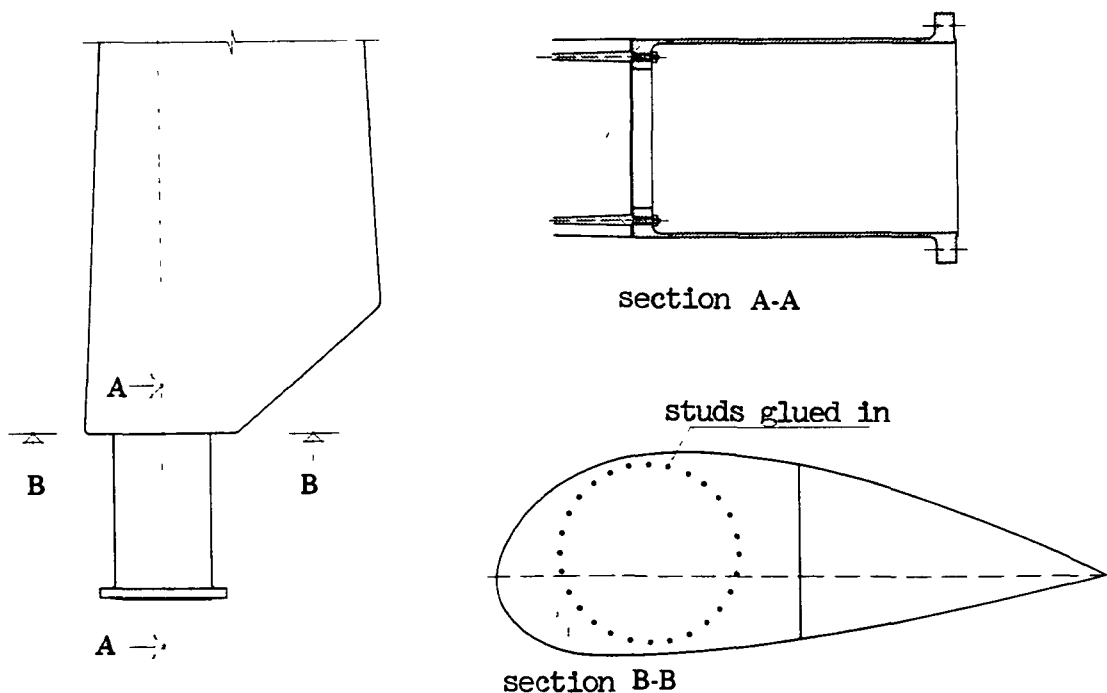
Details of attachment with glued-in stud bolts and a middle piece of stainless steel.
